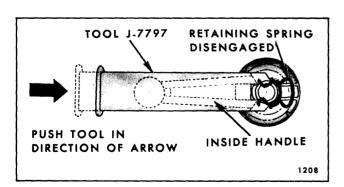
Rear Quarter Window Regulator Handle Removal
